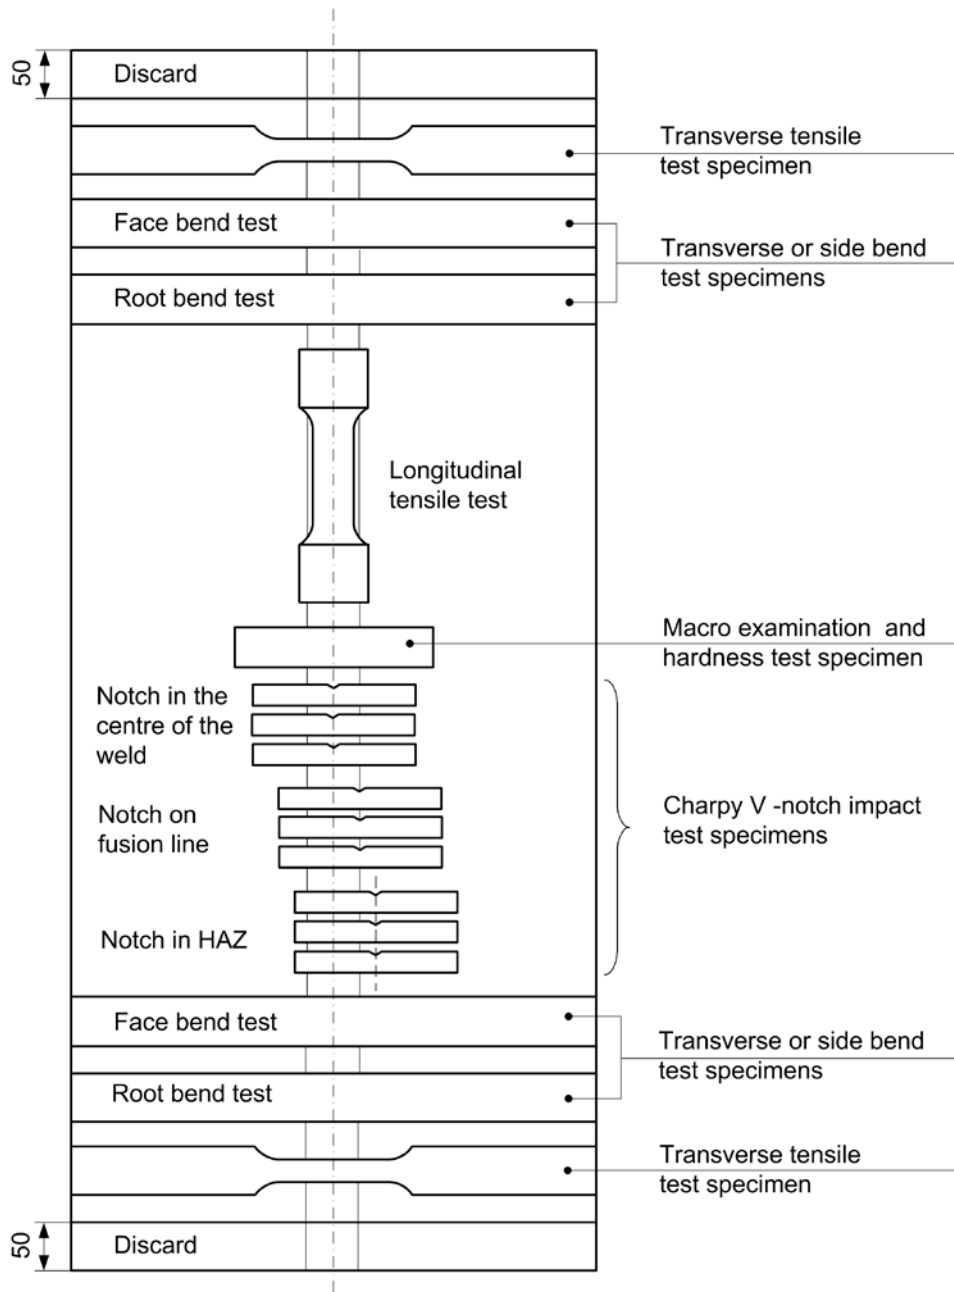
Arrangement of butt weld test assembly for destructive testing
